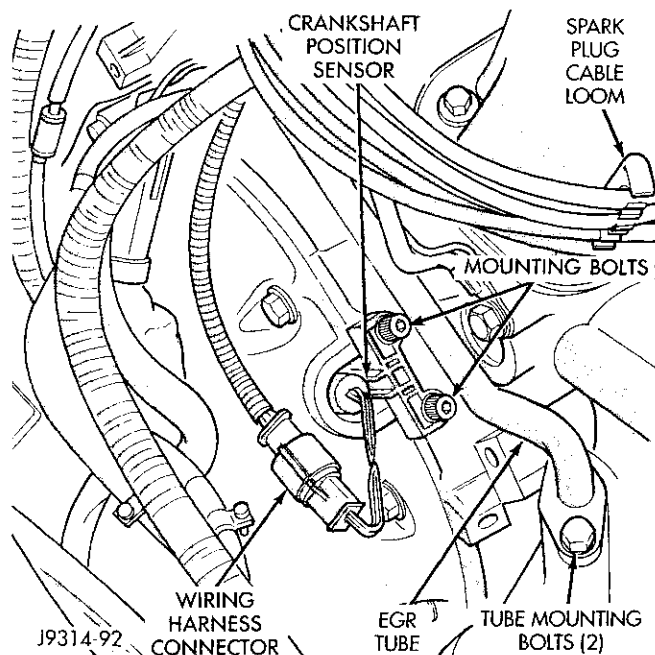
Crankshaft Position Sensor—5.9L HDC V-8 Engine
